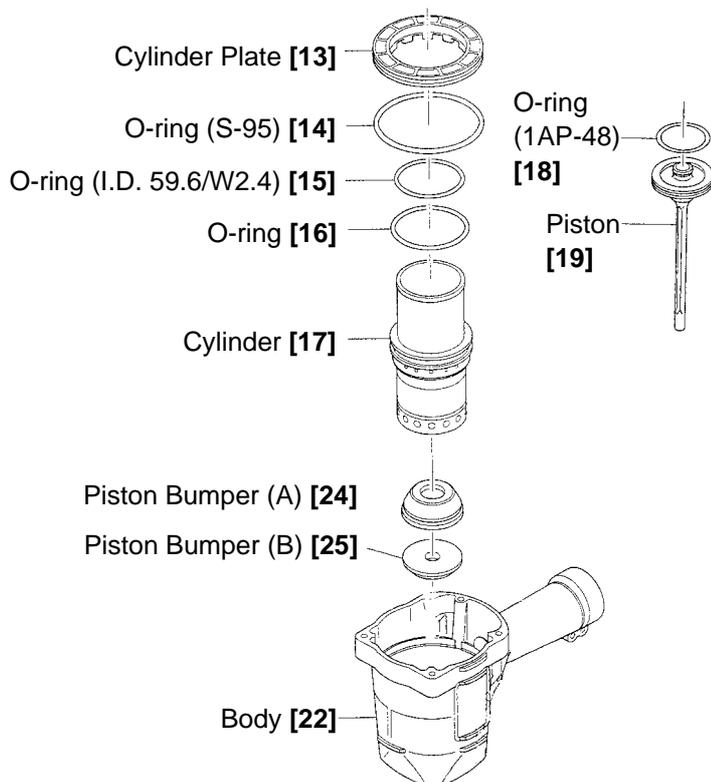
Disassembly and reassembly of the cylinder, piston, piston bumper, etc.
